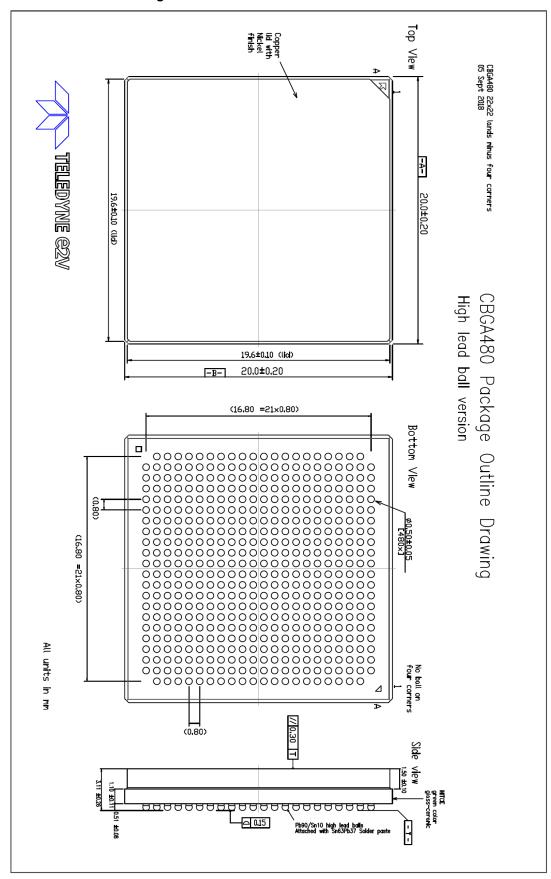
Mechanical outline drawing with Pb90Sn10 balls
